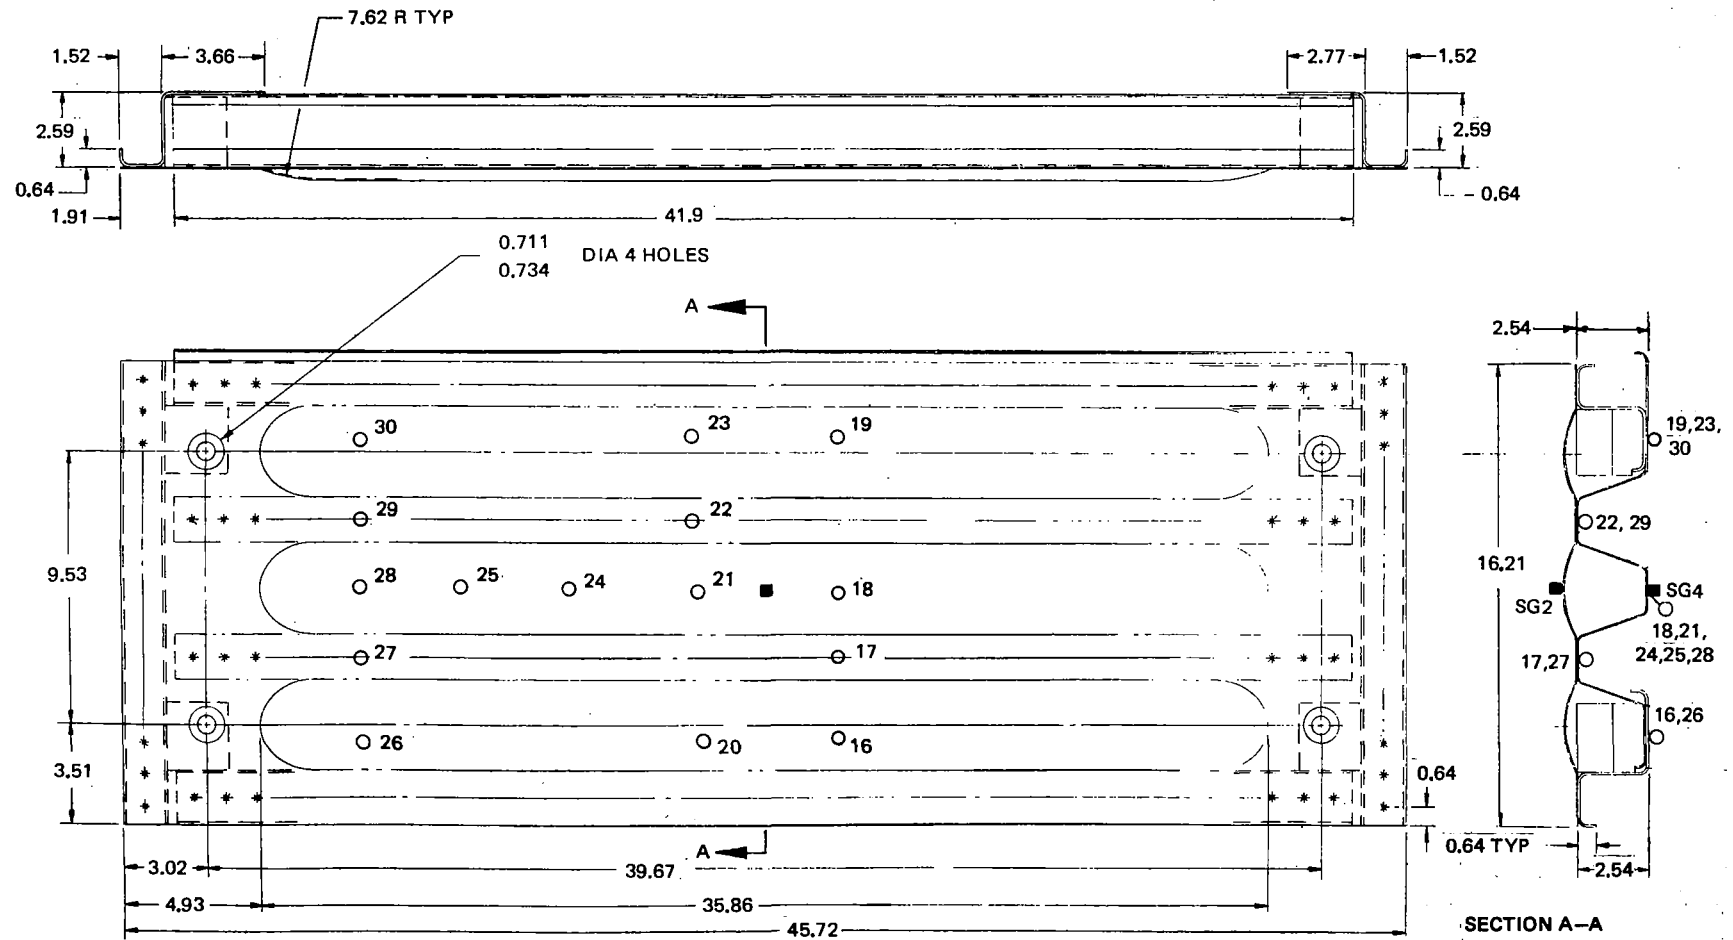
Instrumentation Points on Corrugation-Stiffened Test Panel
